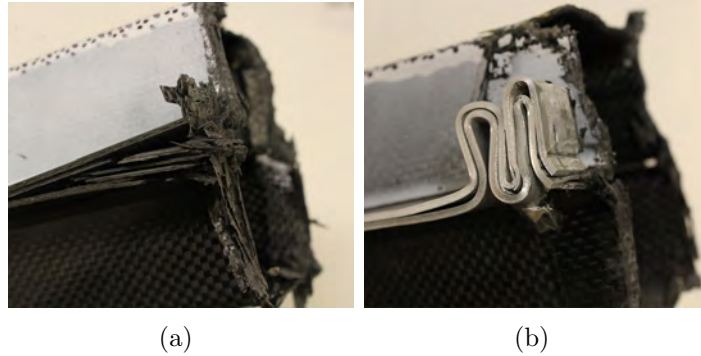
Failed flanges after axial crush testing: (a) riveted samples; (b) UAM samples.
